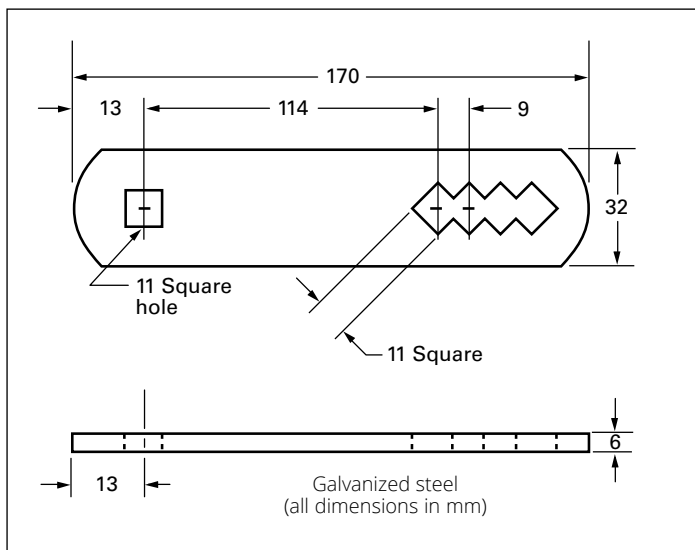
Conductive base mounting for use with 3/8 inch hardware (dimensions in mm)
